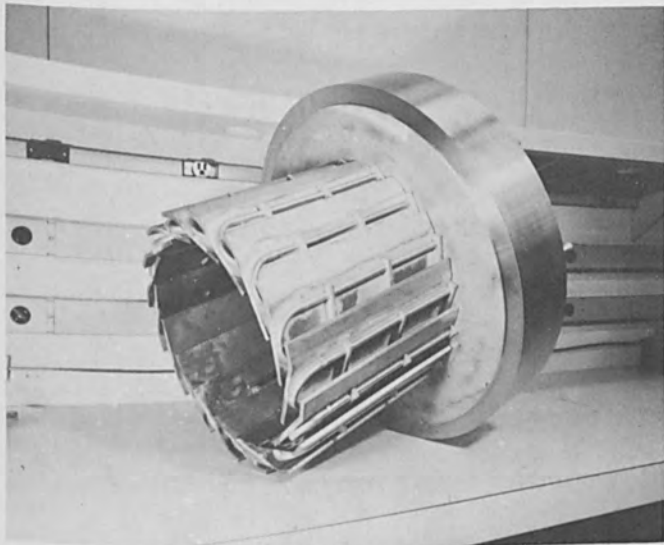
Top Flange and Water Cooled Titanium Panel Assembly
